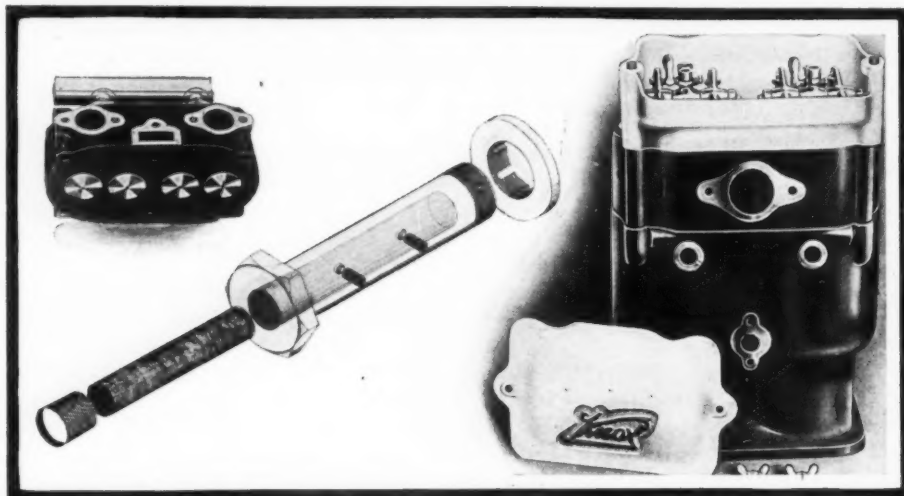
Cylinders with valves, lubricated shackle bolt, assembled cylinder block
